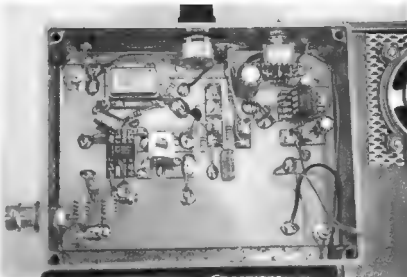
A view inside the receiver case showing the suggested layout of the components.
